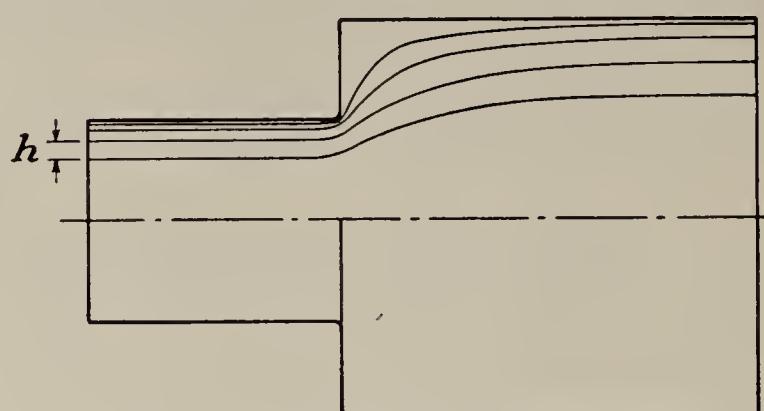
Circular stepped shaft divided into equitorque tubes.
